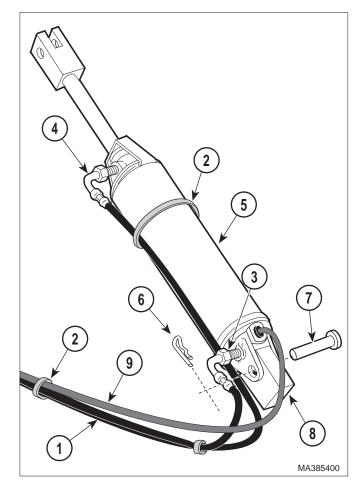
Hydraulic Back Cylinder Removal / Installation
